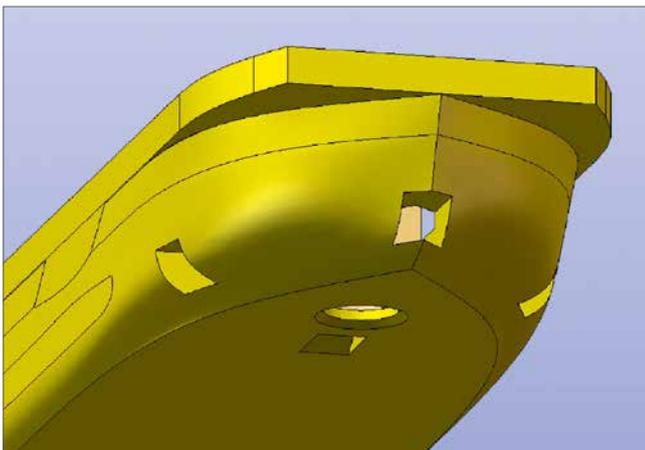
Bow with U-shaped frame and transverse thruster [DST]
